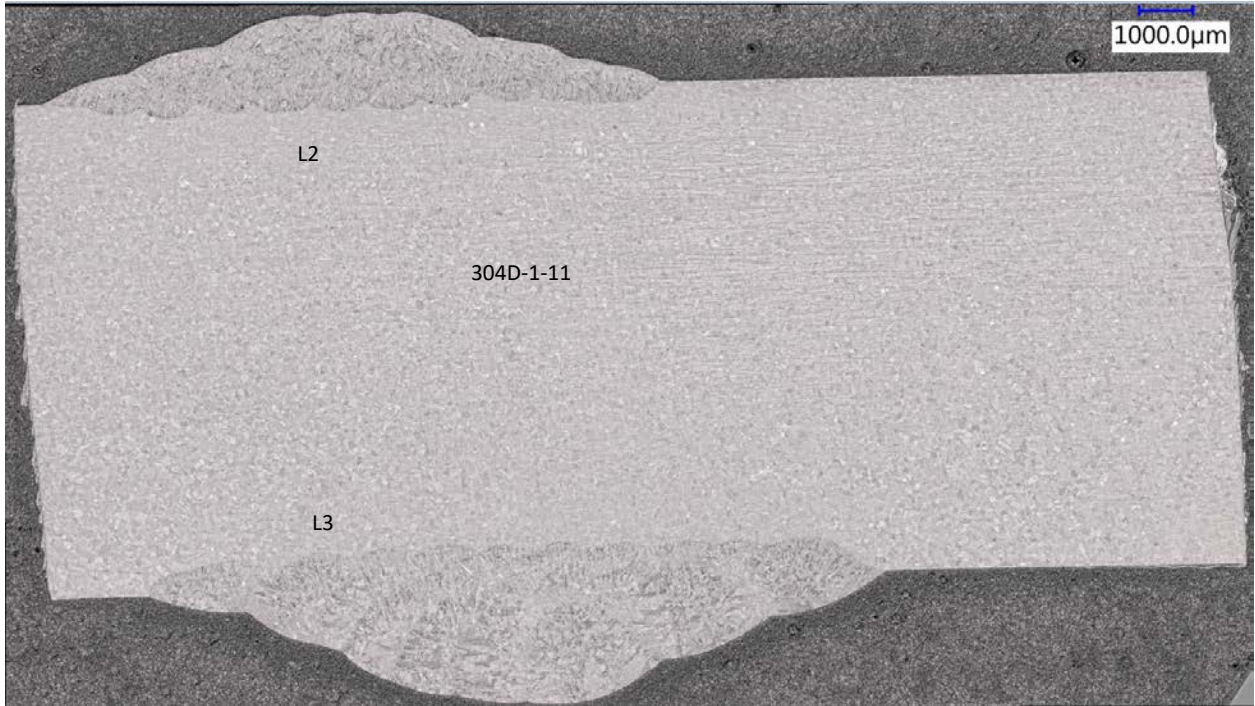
Cross-section view of laser weld 304D-1 (15.6 ammp He)
